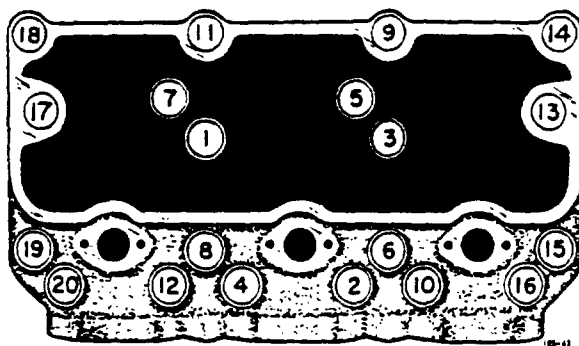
Cylinder Head Stud Nut Tightening Sequence
